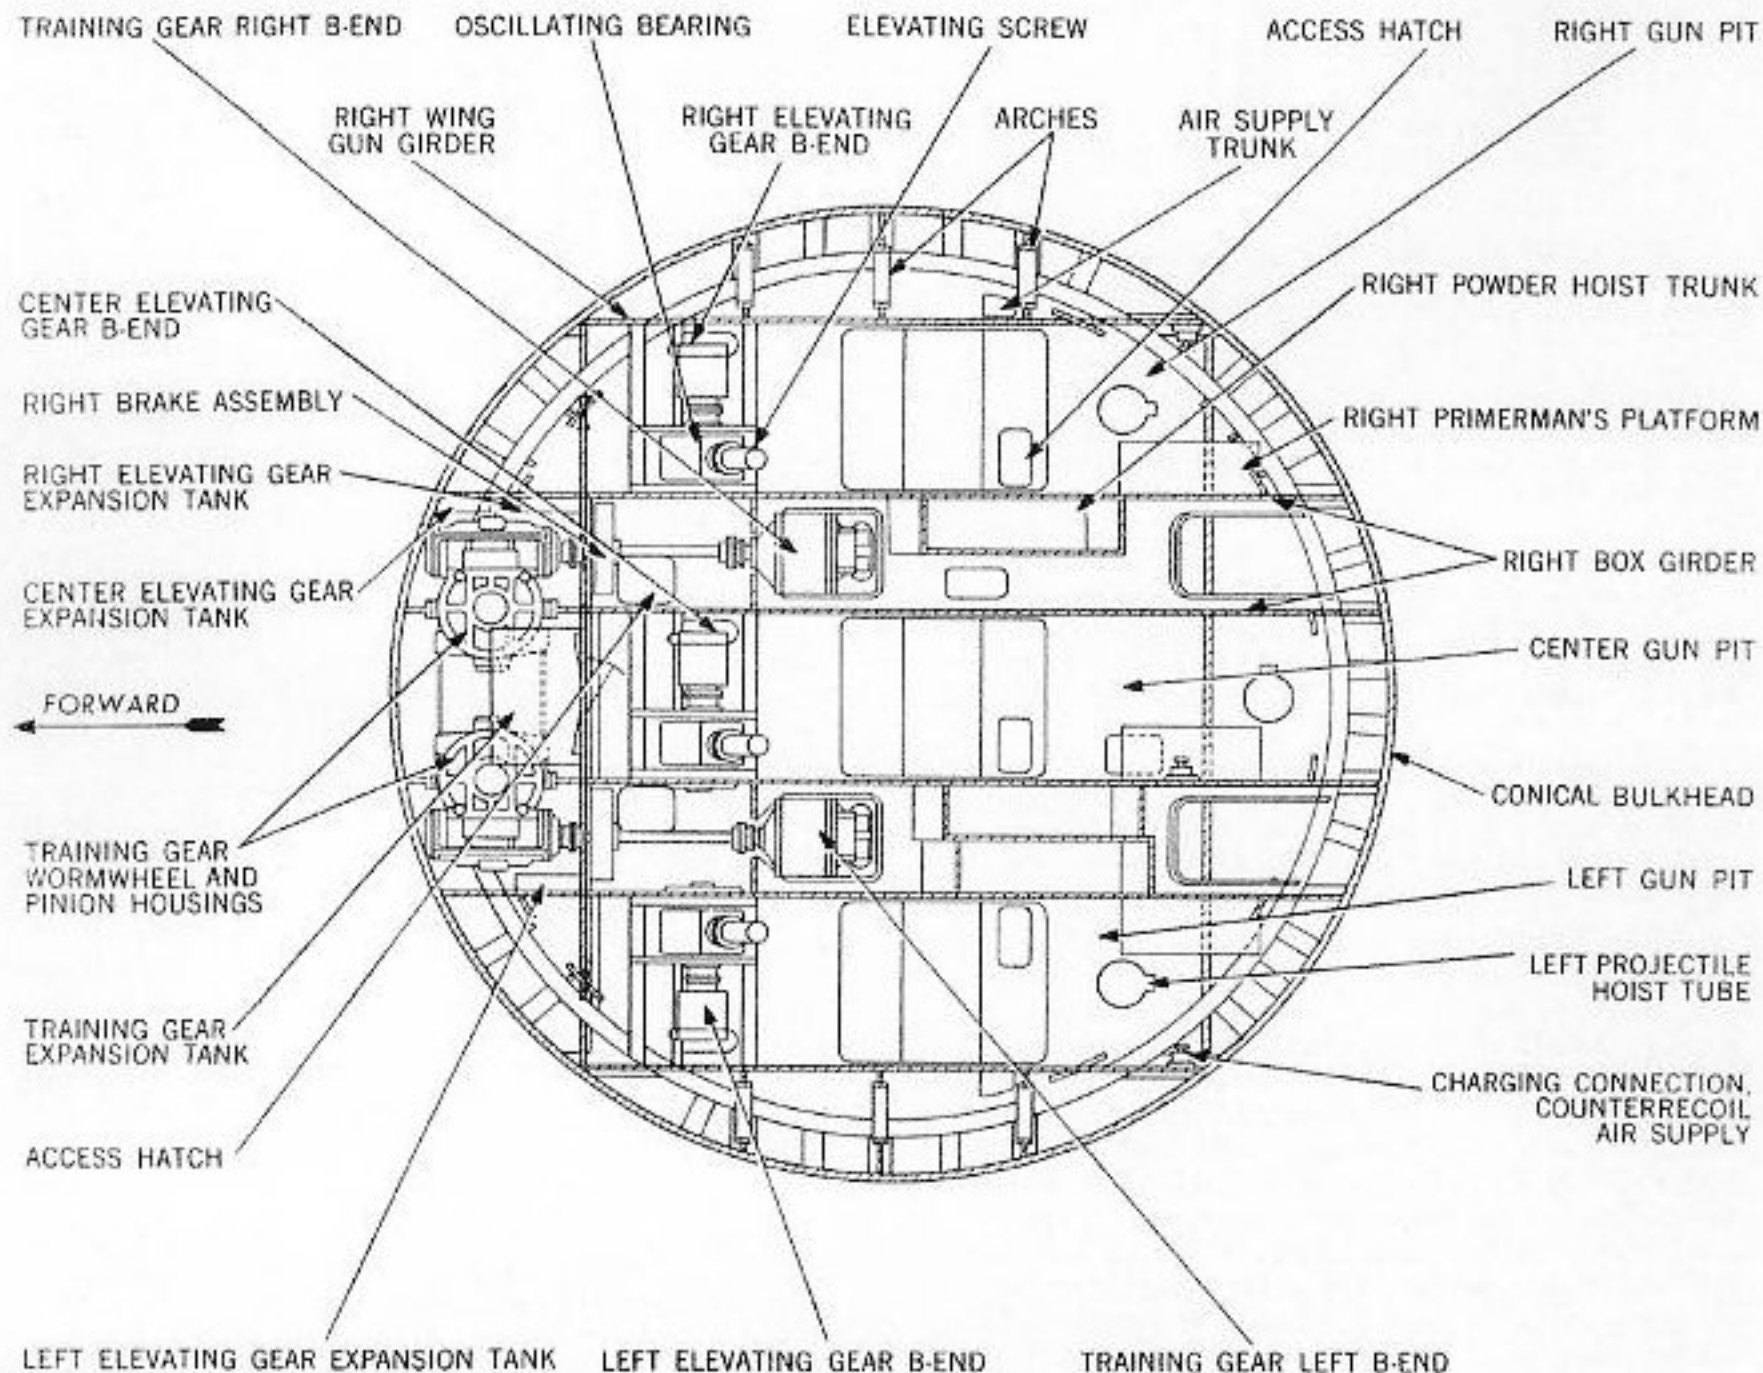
Ordnance Equipment on Pan Floor - General Arrangement - Plan View
